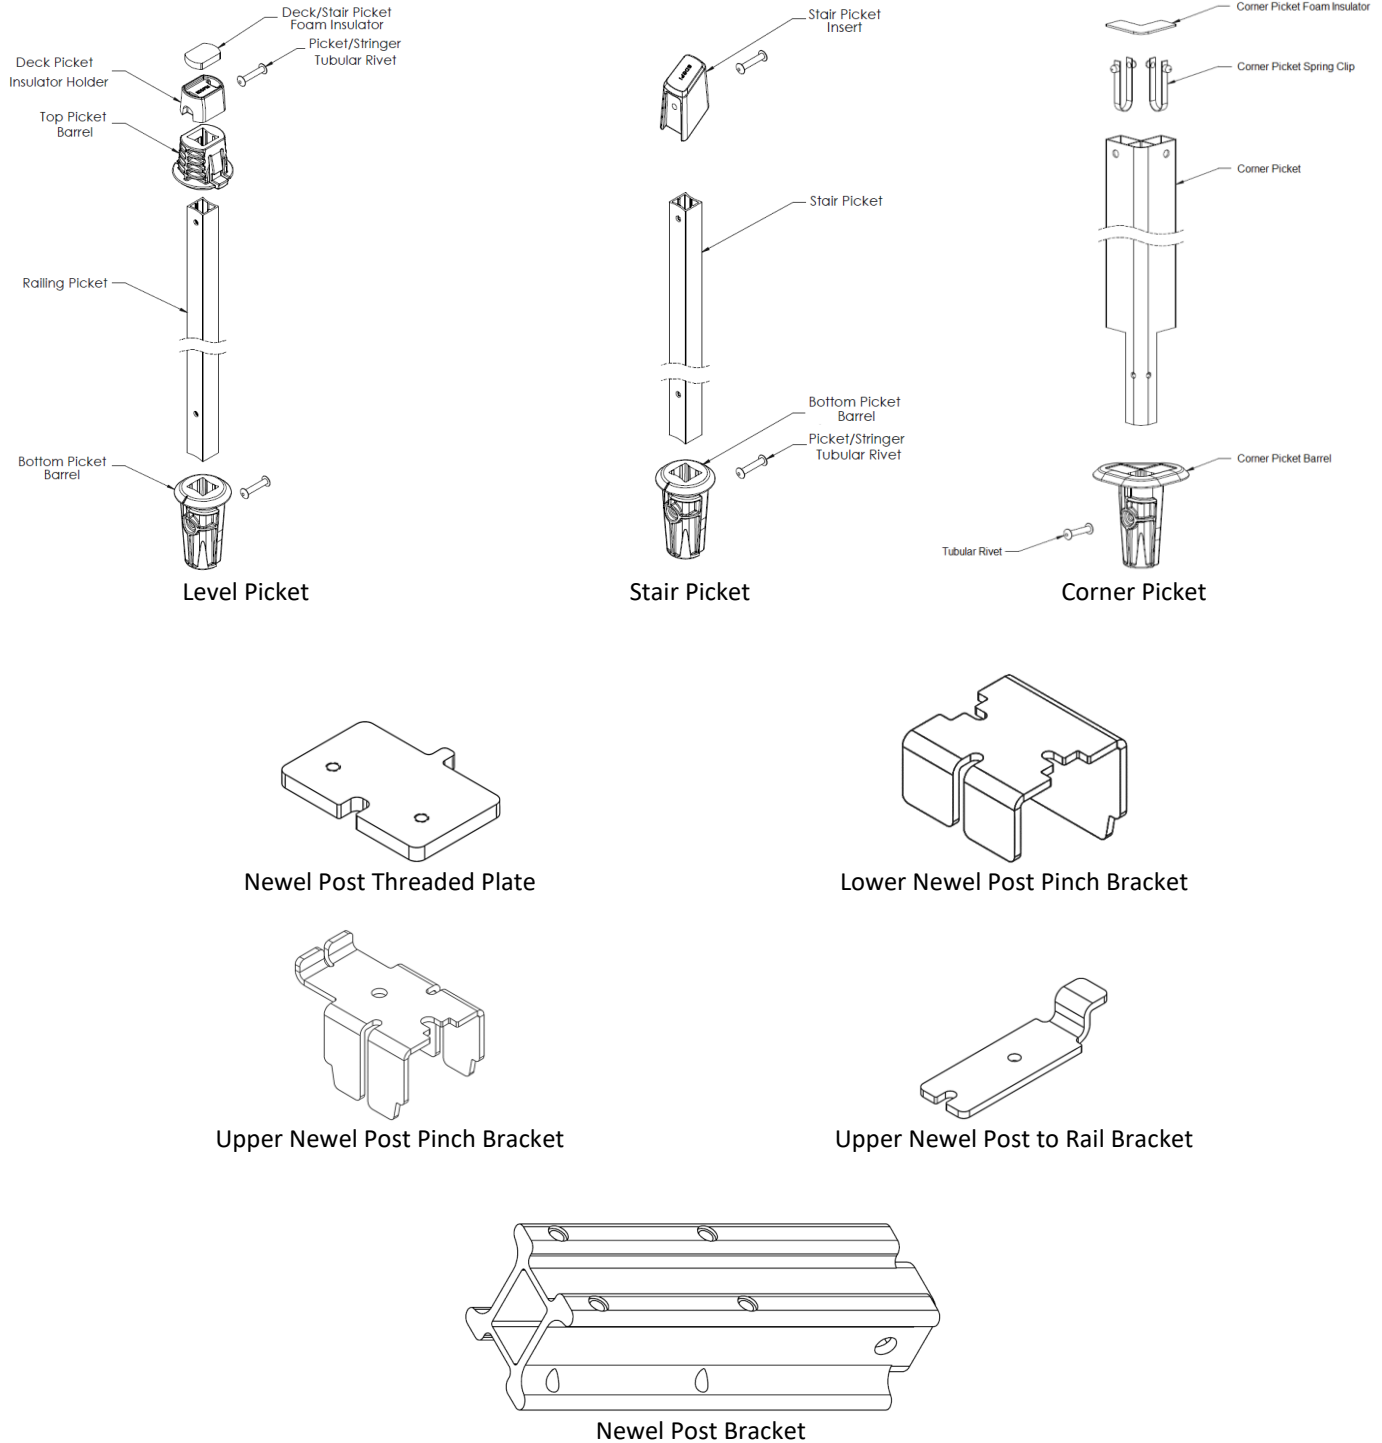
Guardrail Assembly Components, Connectors, and Brackets
